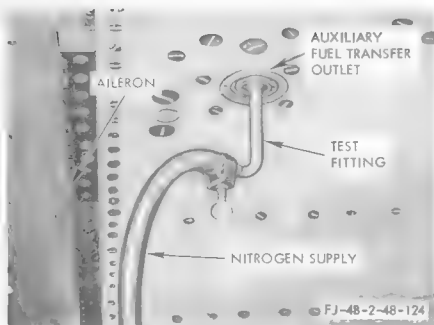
Auxiliary Fuel Transfer Line Test Fitting
